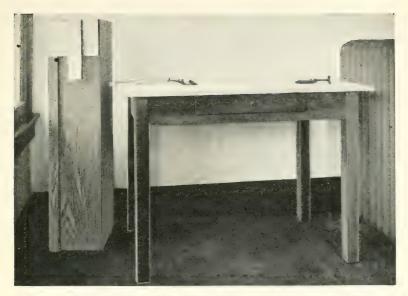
You Must Have A Work-Bench if that Bench be Nothing more Than A Kitchen Table
